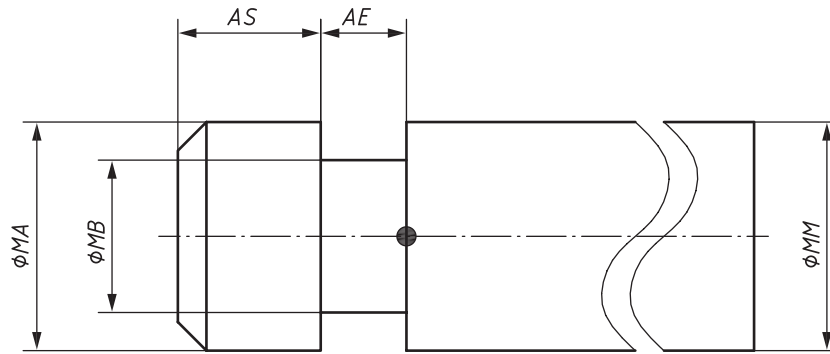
RFS_x — Grooved piston rod end with TRP at the shoulder level
